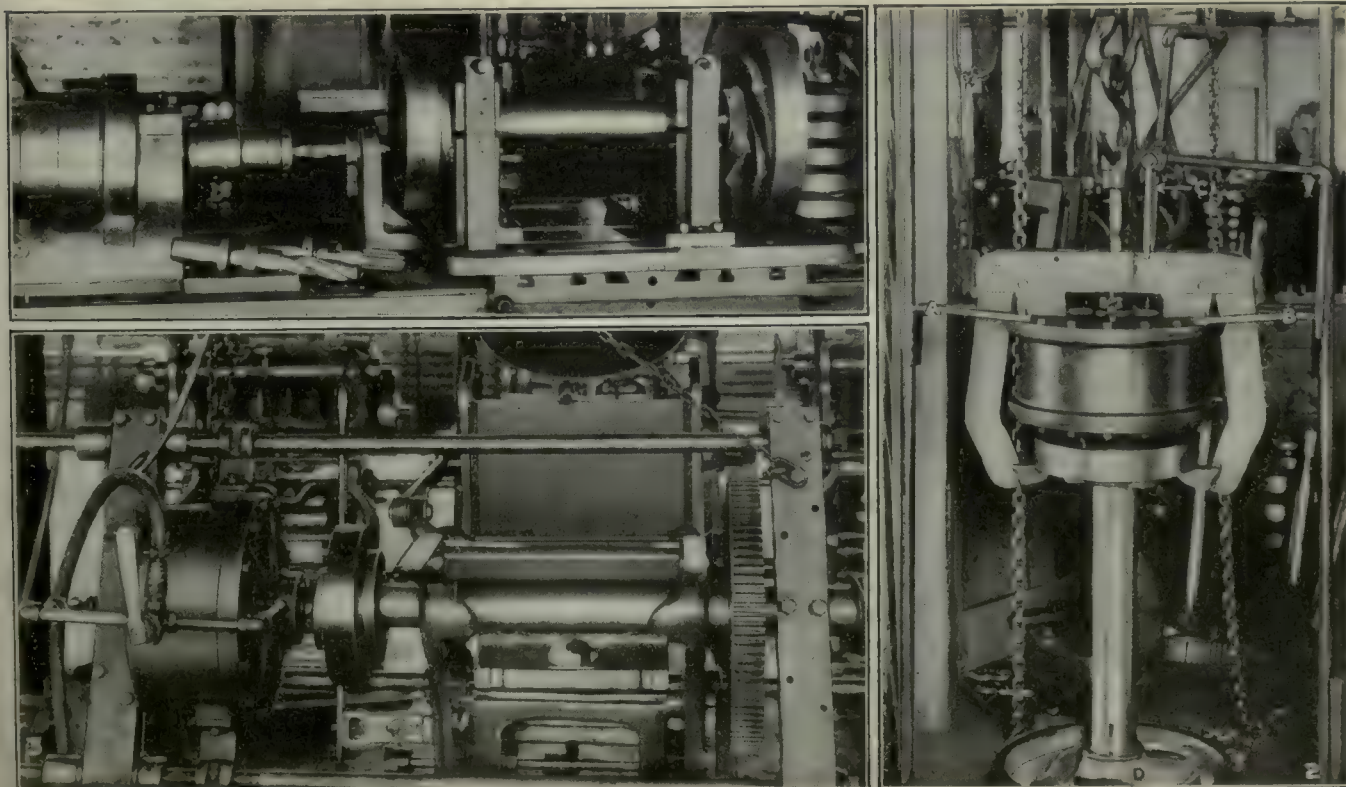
DRILLING CRANK PIN HOLES. FIG. 2—REMOVING CRANK PIN DISK. FIG. 3—ASSEMBLING THE GEAR SHAFT
